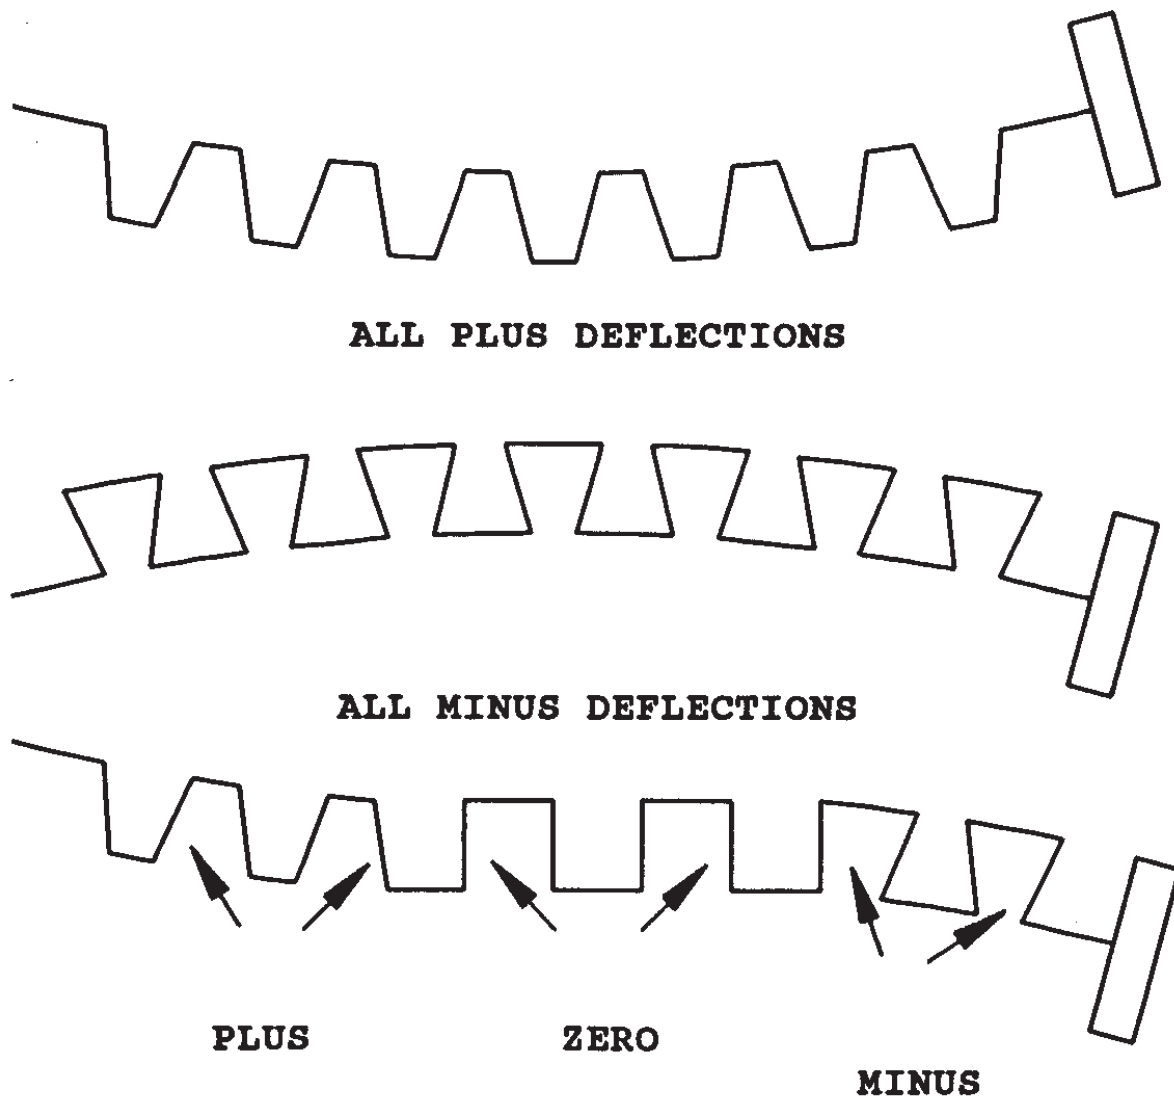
Sketches of a Relative Crankshaft Shape
